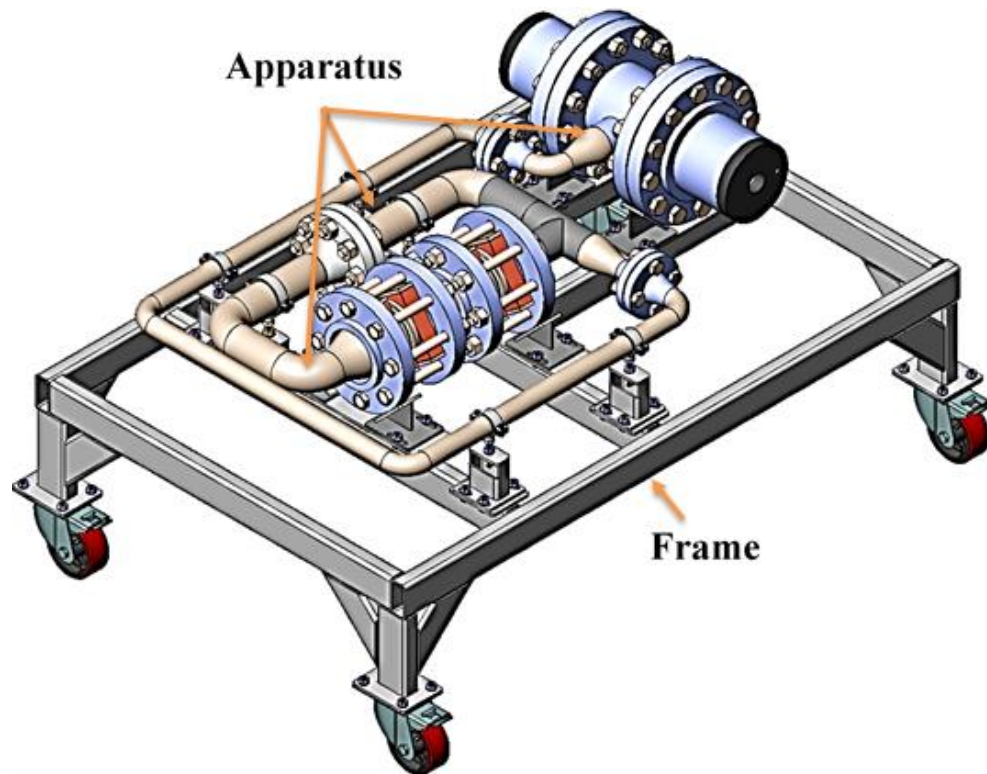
Schematic showing the assembly of the apparatus and a mobile frame.
